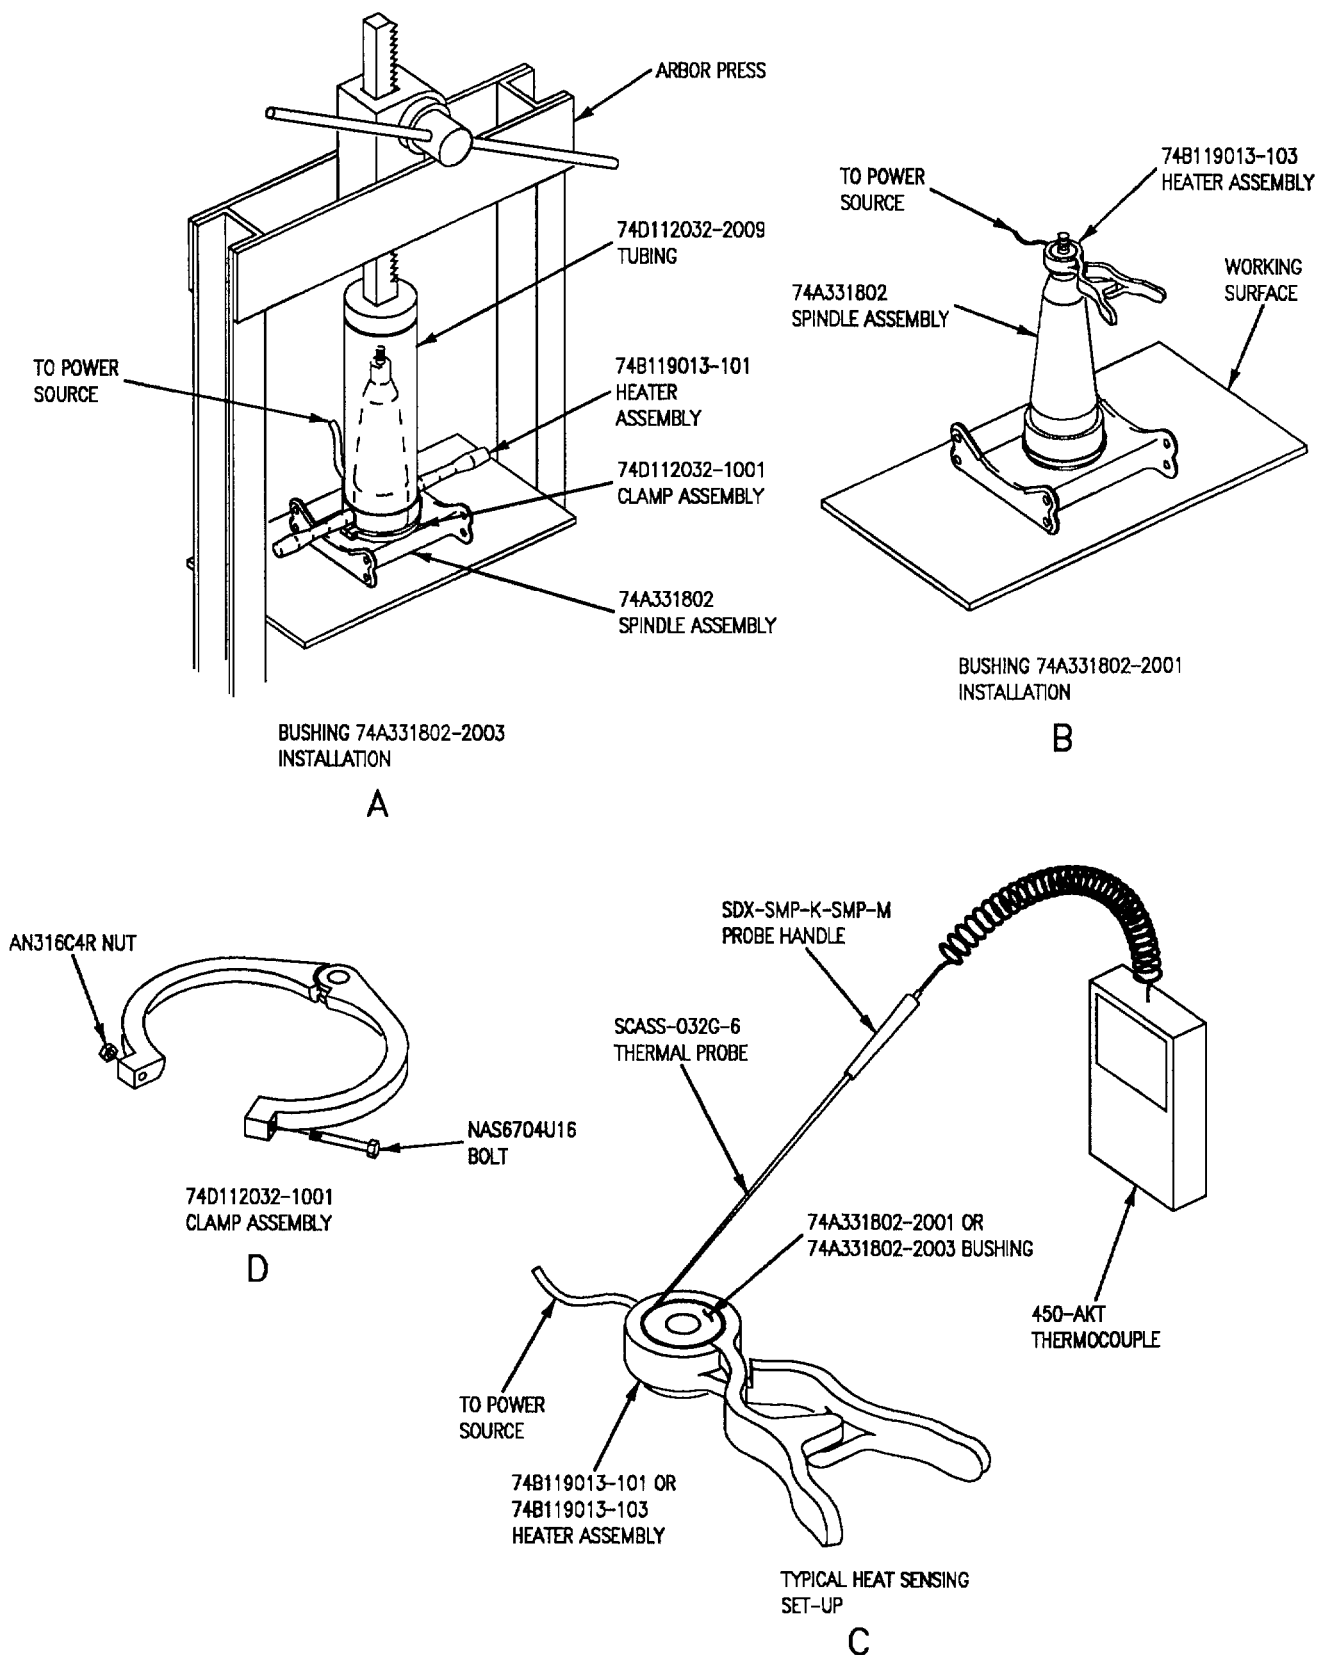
Horizontal Stabilizer Spindle Bushing Installation Set
